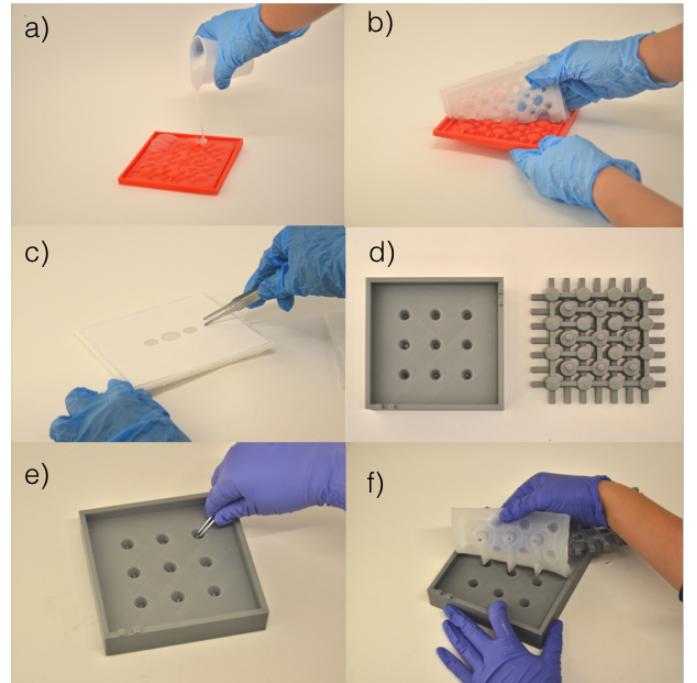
Fabrication process of the Texture Modules (TM). To fabricate the multi-scale TU-GB, a mold of the positive of cavities and conduits is 3D printed and the elastomer is poured to fabricate the upper part (a–b). The bottom layer is fabricated with an inextensible film embedded in it, and attached to the upper part before it is cured (c). For the TU-GB and TU-S mixture TM, the mold is composed of two parts (d). Rigid elements are embedded into the mold for the haptically expressive tips (e–f).
